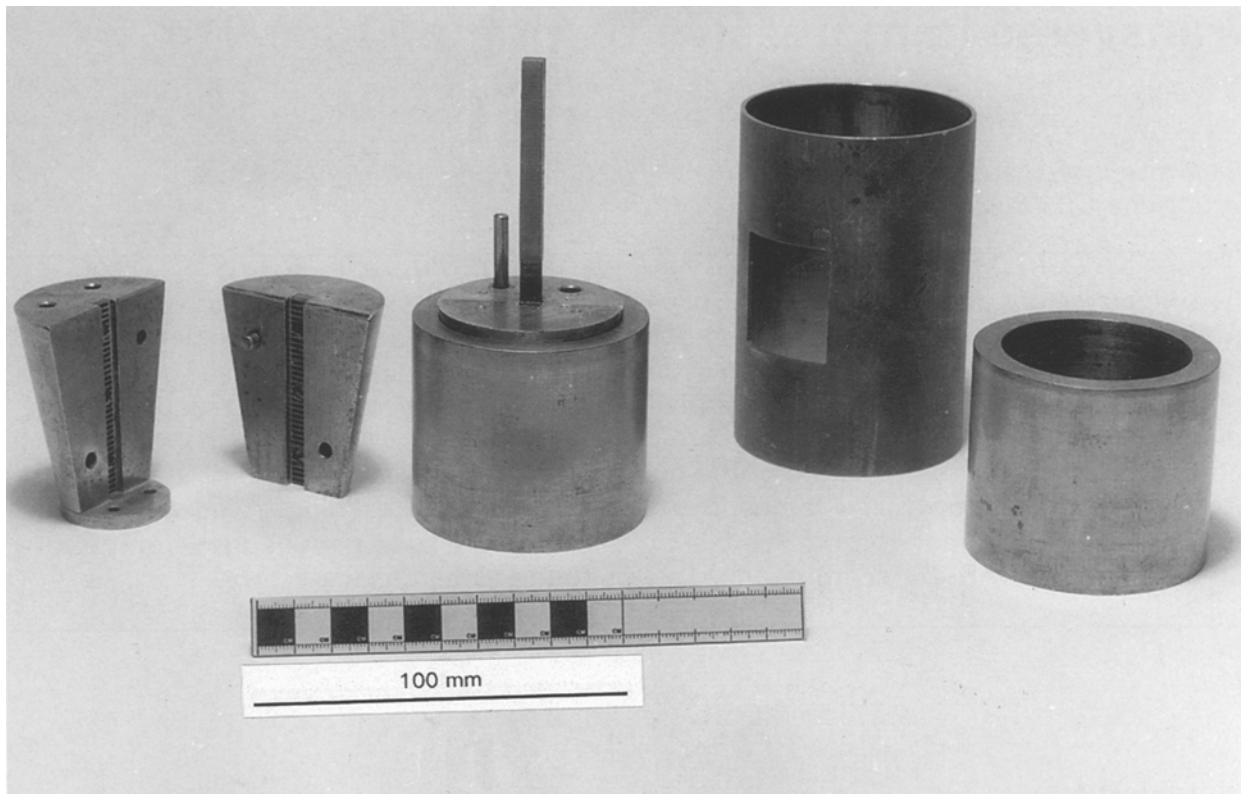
Partially assembled Celanese compressive test fixture with specimen.
